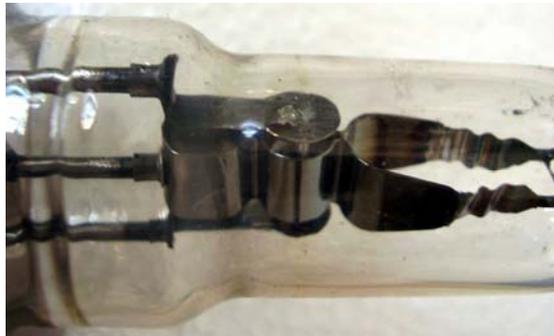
Detailed view of the anode-line assembly. Noteworthy is the termination of the three rods to which the blades that hold the filament and the center of the back-loop of the inner line are fixed. Rods are welded inside rivets fixed to the supported elements. We can observe similar solutions into another Siemens magnetron built to -P.T.R. design, the [RM4025](#),
